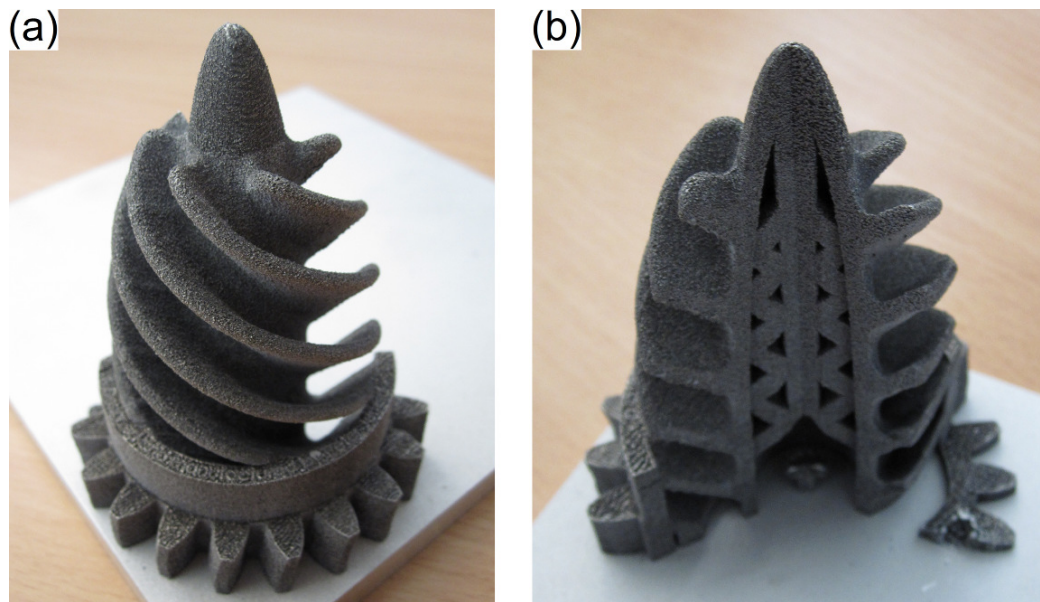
Photographs of the finished demonstration part before post processing: (a) advanced geometry, gear and bearing surface; (b) internal structure.
